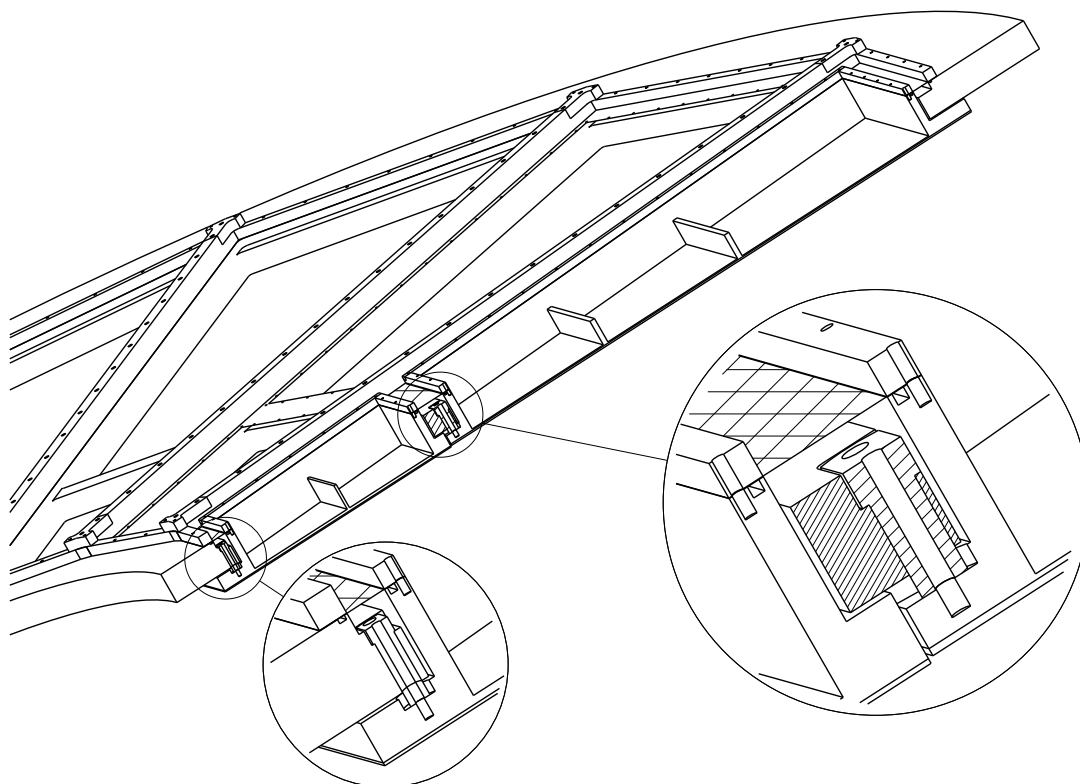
Cross section of inner readout chamber perpendicular to wires.
